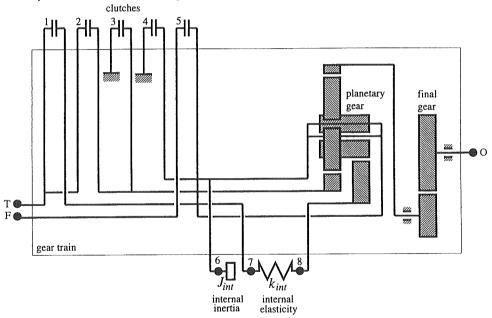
Example of gear train for multi-clutch model (gearbox ZF 4HP18).
